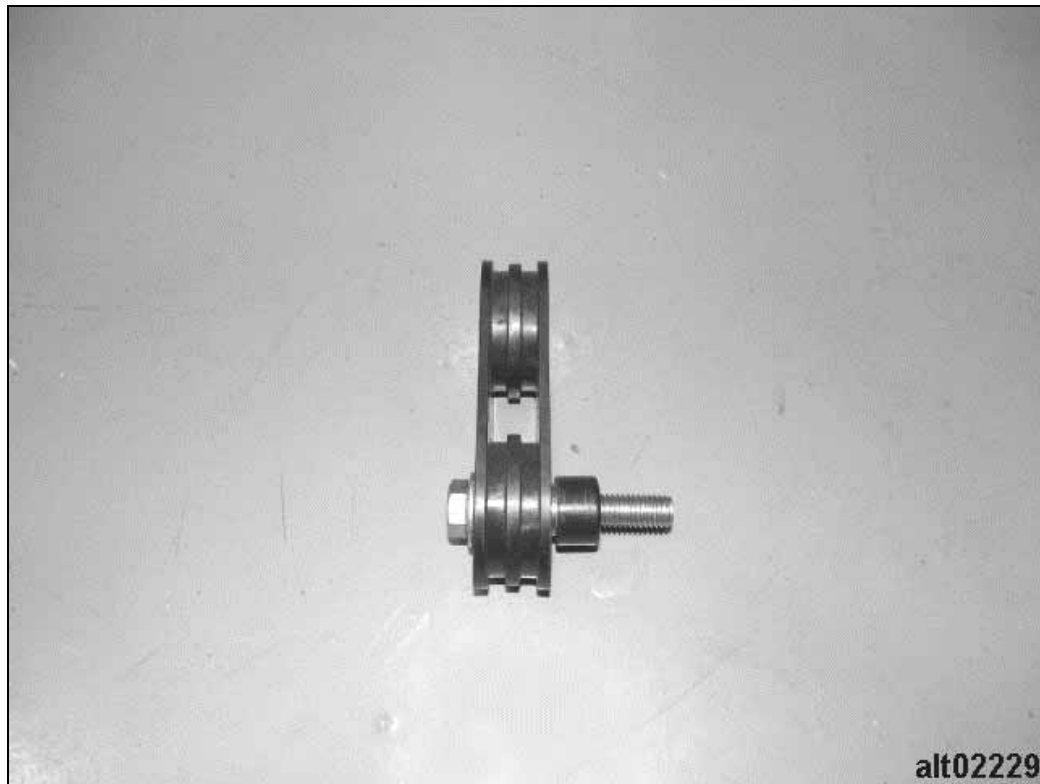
Bracket installed on lower parallel arm for mounting chain tensioner
